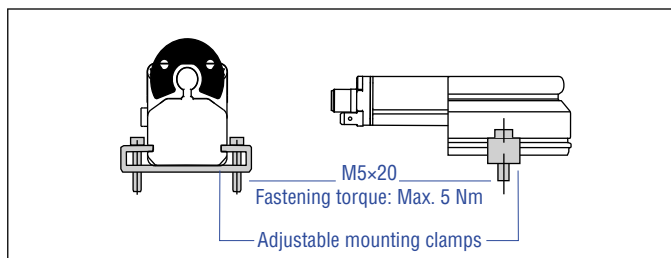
EP with mounting clamps with cylinder screw M5×20 (part no. 403 508)
